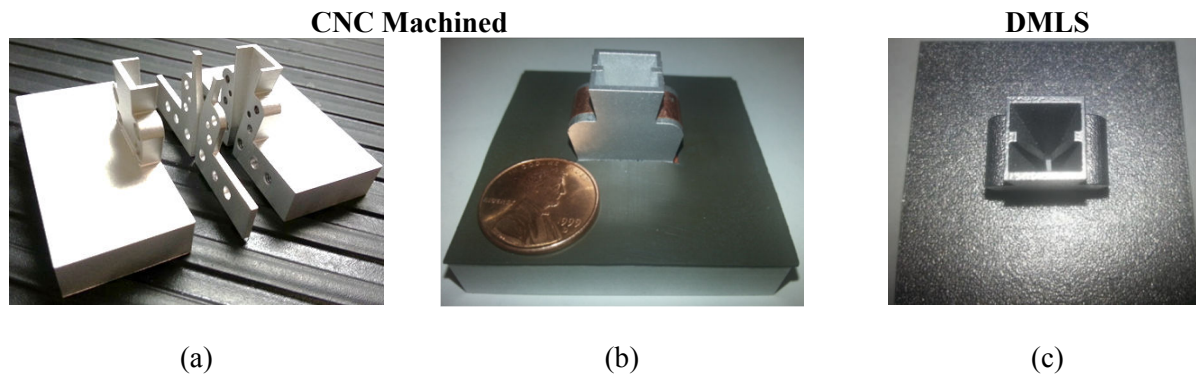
Prototypes of horn design 1, fabricated using CNC machining (a) disassembled, (b) assembled with adhesive absorber and (c) fabricated using DMLS.
